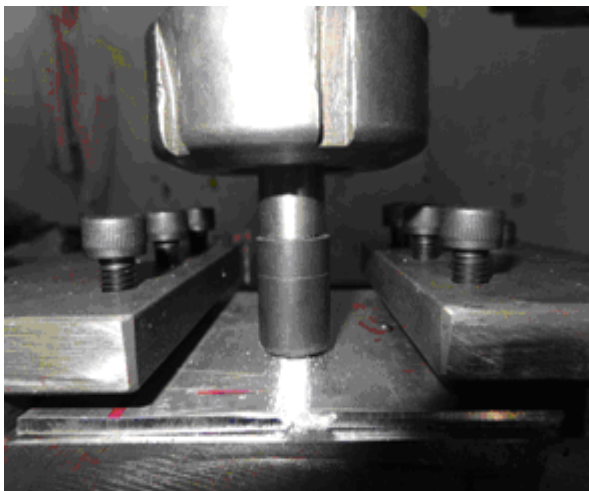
Experimental Setup describing clamping and welding of FSW plates
